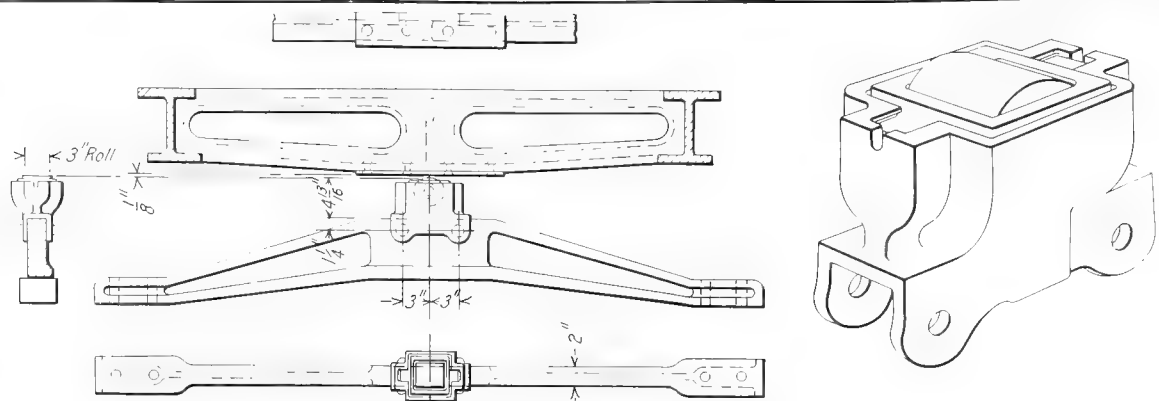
Miner Single Roller Side Bearing as Applied to Passenger Equipment Six-Wheel Trucks. W. H. Miner.
